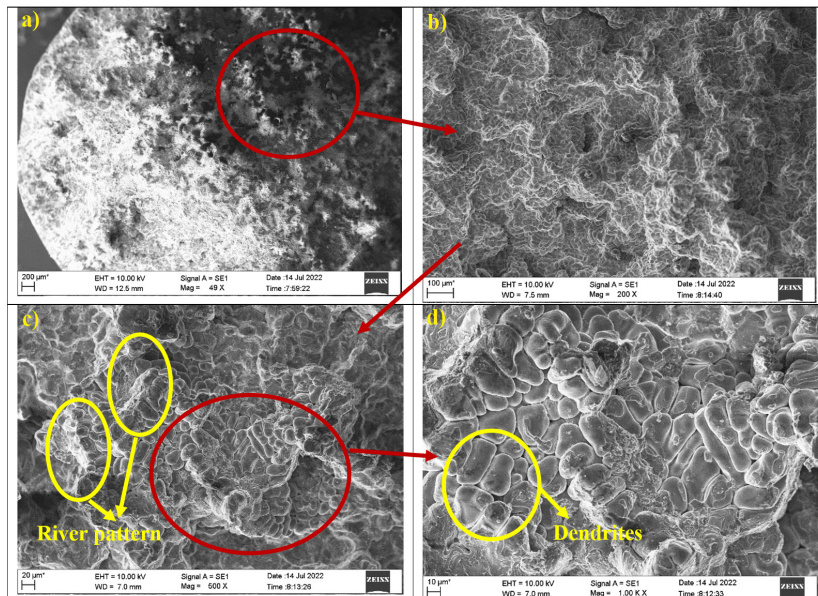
SEM micrographs of fracture surface of A5 tensile specimen after fracture.
